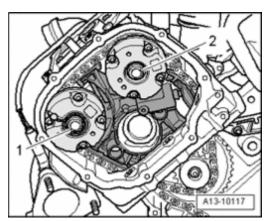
Setting Crankshaft And Camshaft To TDC At Cylinder 1 Courtesy of VOLKSWAGEN UNITED STATES, INC.
